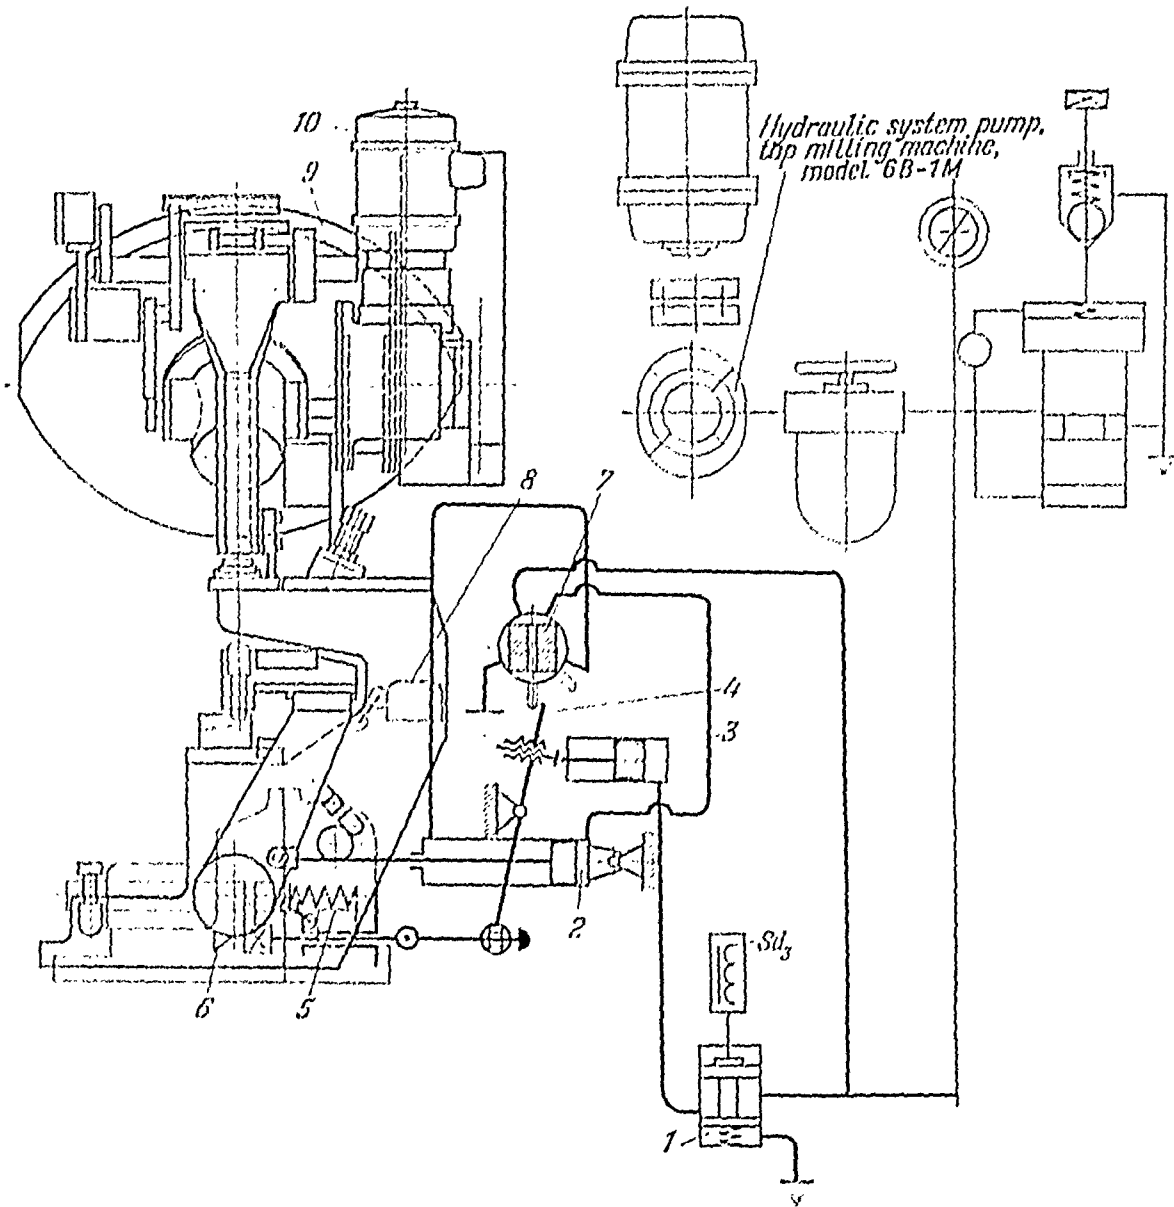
Hydraulic circuit diagram of the automatic loading device for the model 6B-1M milling machine
